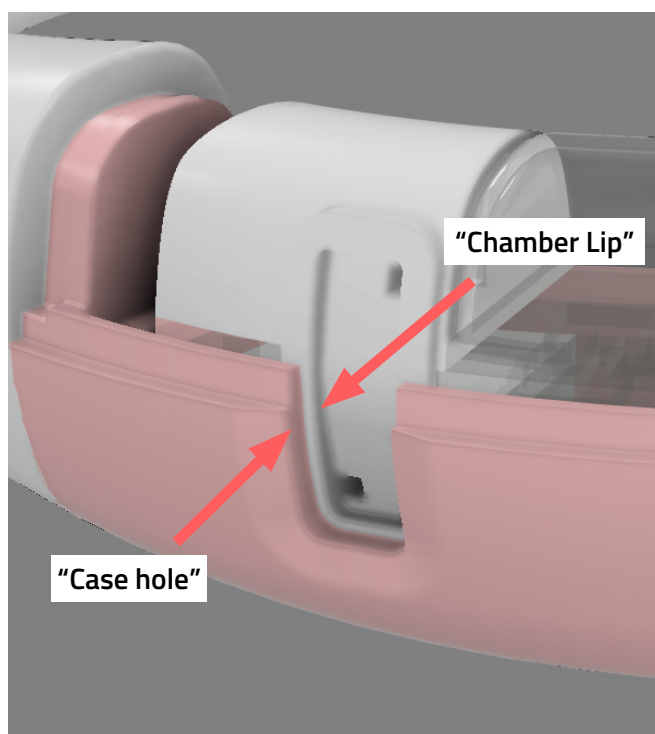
During the early prototype stages, the membrane will be mounted in-between these two components, fixed in its place by glue. Then it would be replaced by laser welding
